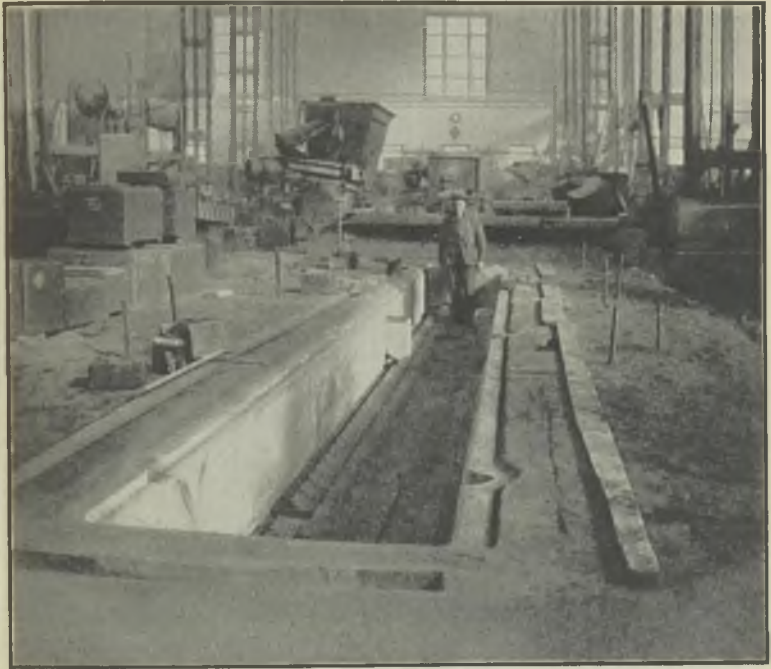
MOULD FOR PLANING-MACHINE CASTING.
